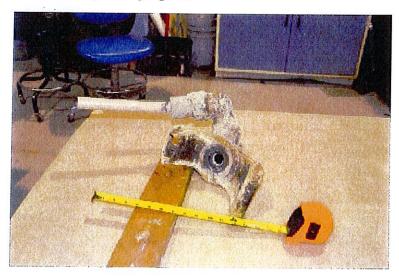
The saddle fitting assembly, bottom view. Note plastic service pipe is askew.
